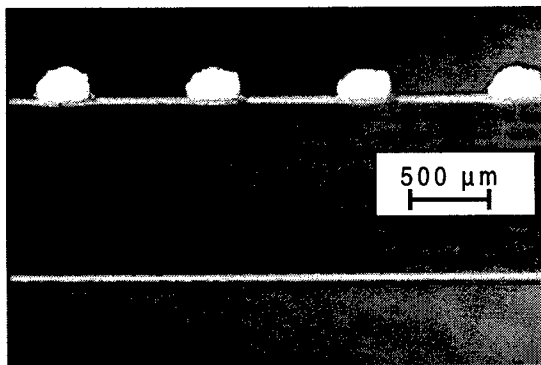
Cross section of laser welded SMD on circuit board
